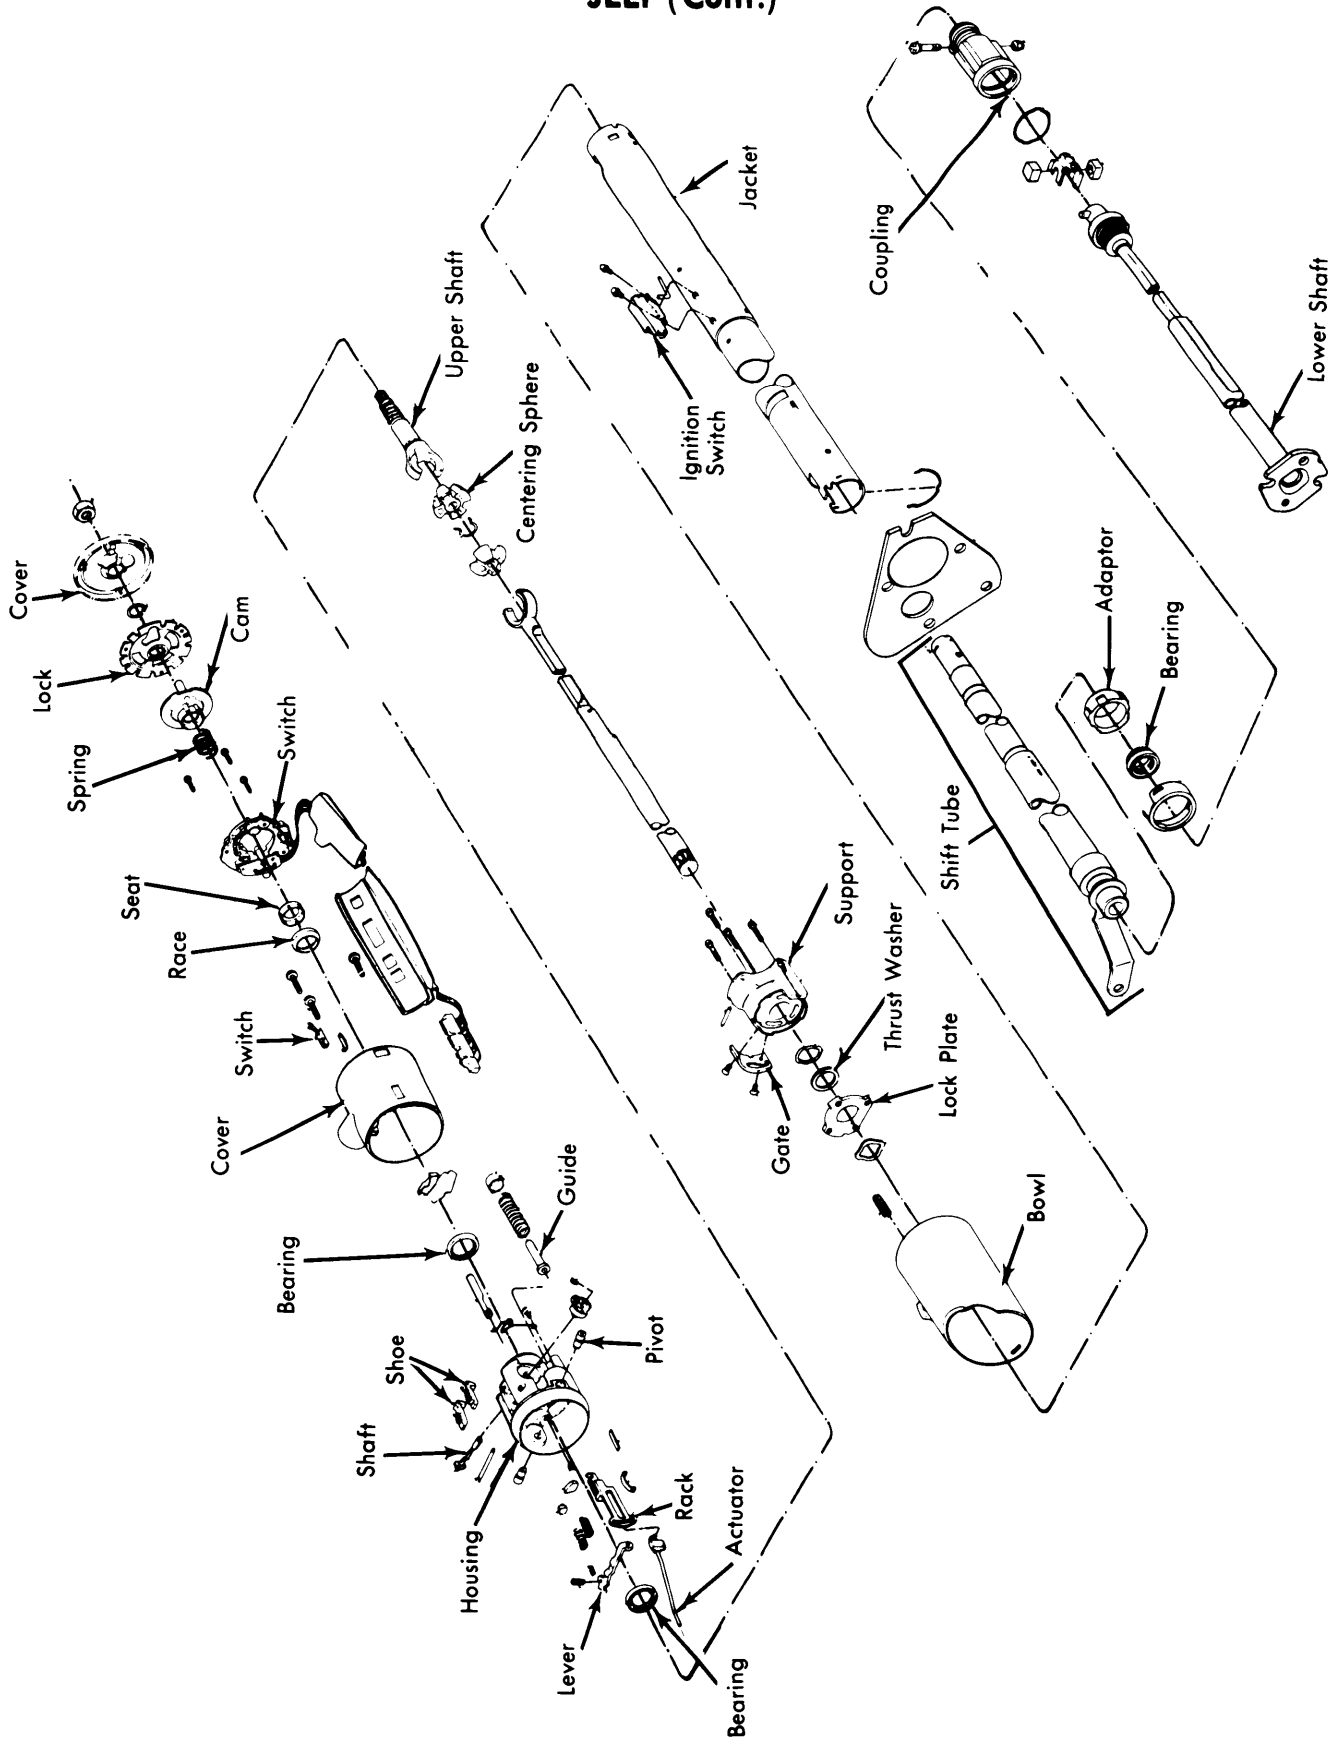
Disassembled View of Tilt Steering Column Assembly
